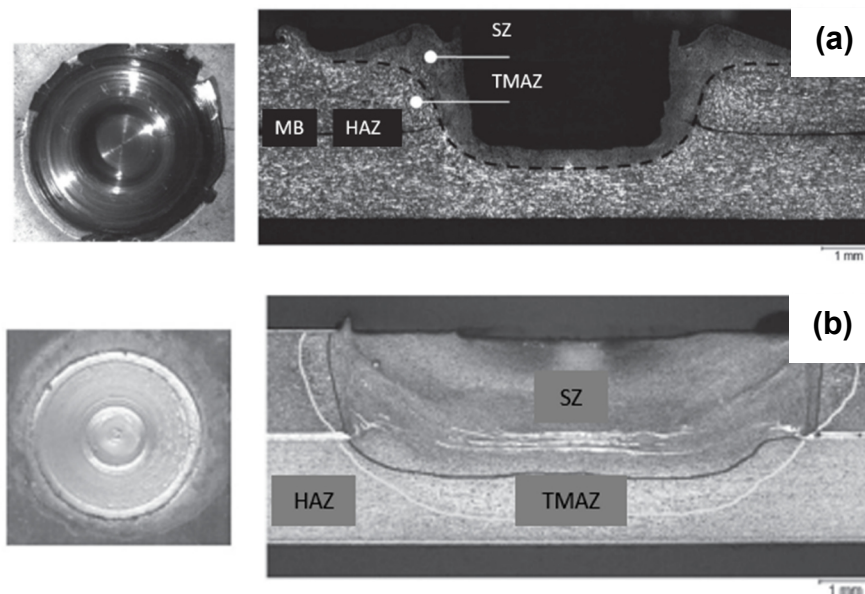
Superficial and cross-section features of the resulting welds performed with (a) FSSW and (b) Refill FSSW [6].
